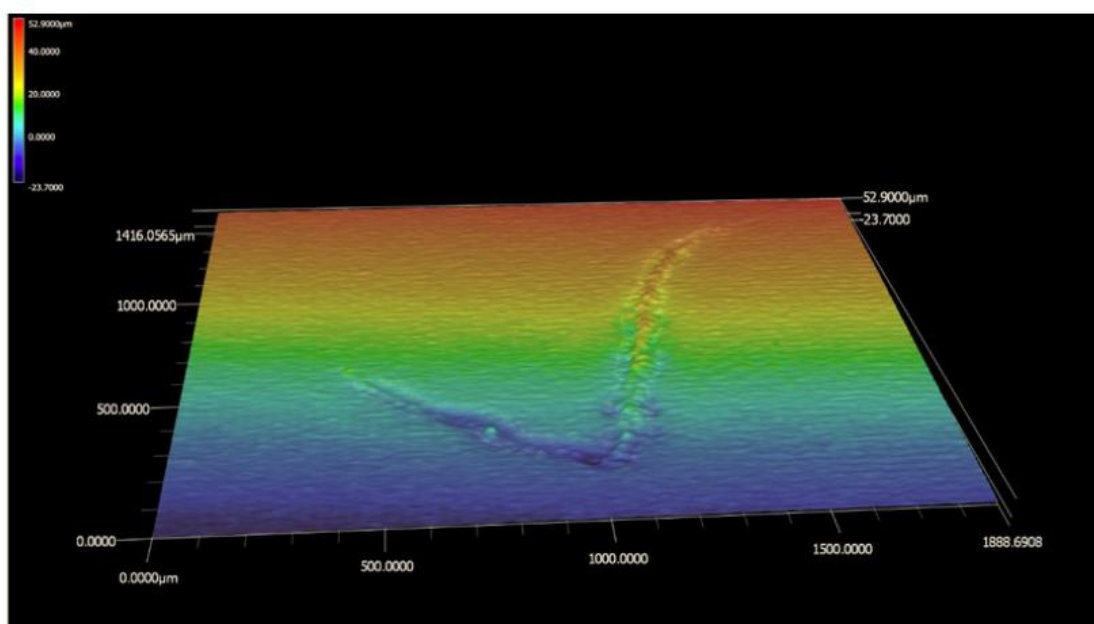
Surface scan of a mold wipe fiber molded onto a part surface
